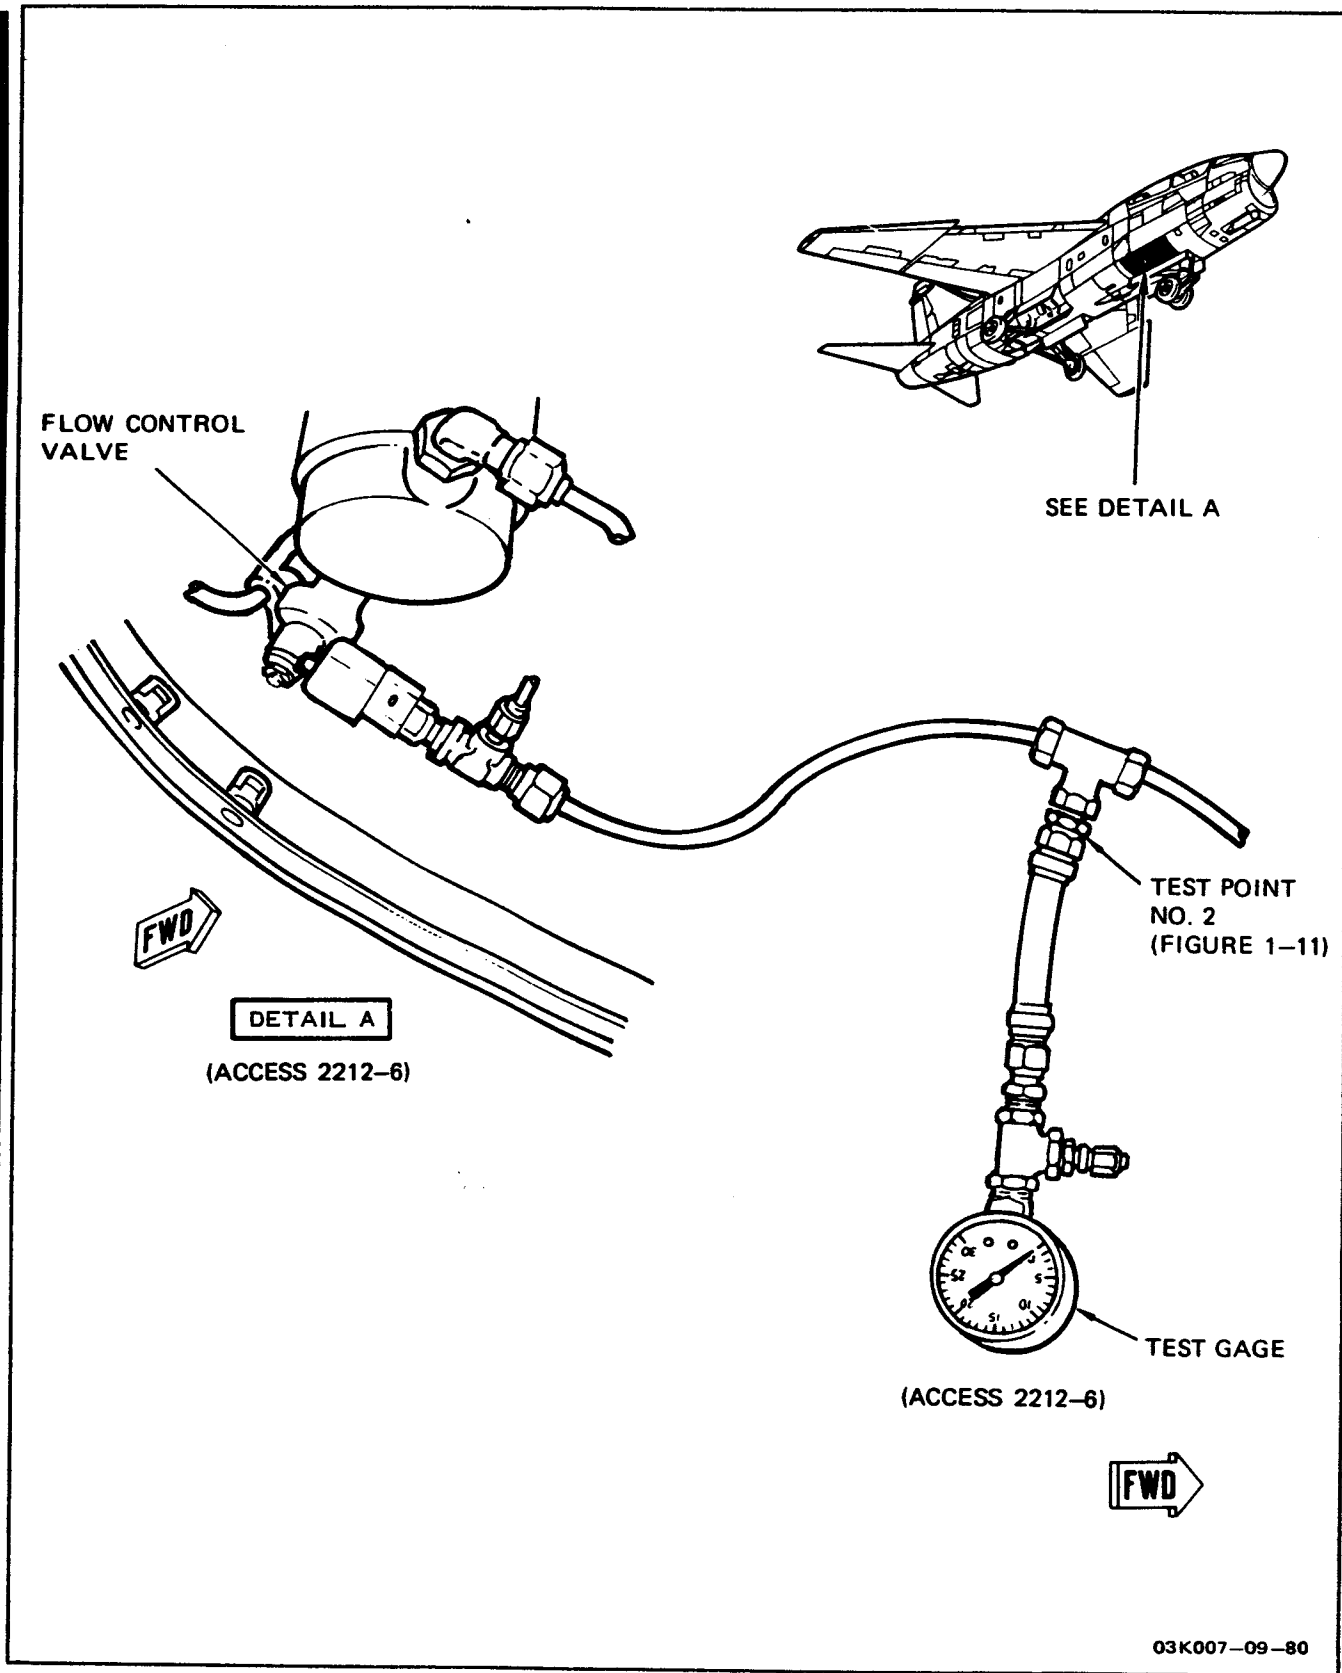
Test Gage Placement (Sheet 2 of 7)
